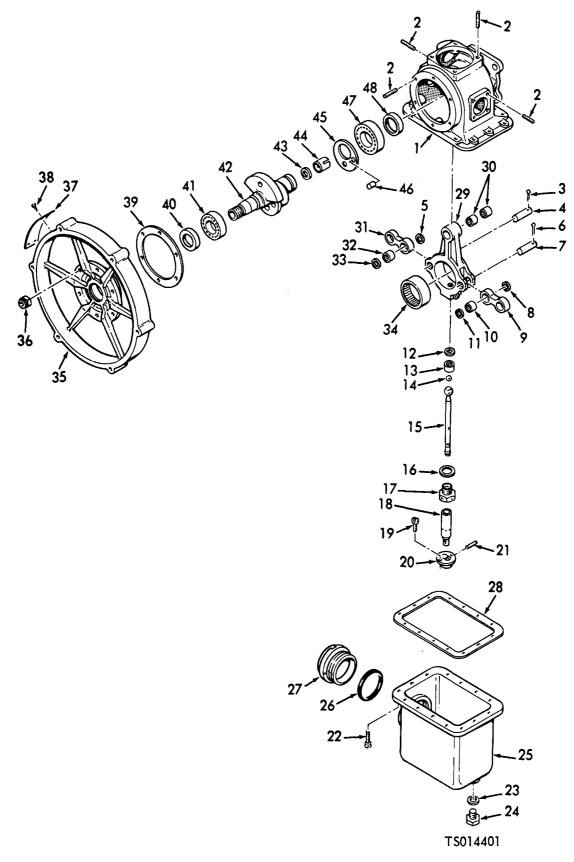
Crankcase assembly, disassembly and reassembly.
